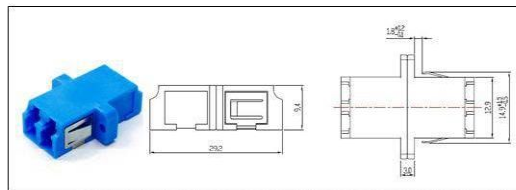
LC SC Footprint Duplex Adaptor Appearance & Dimension
